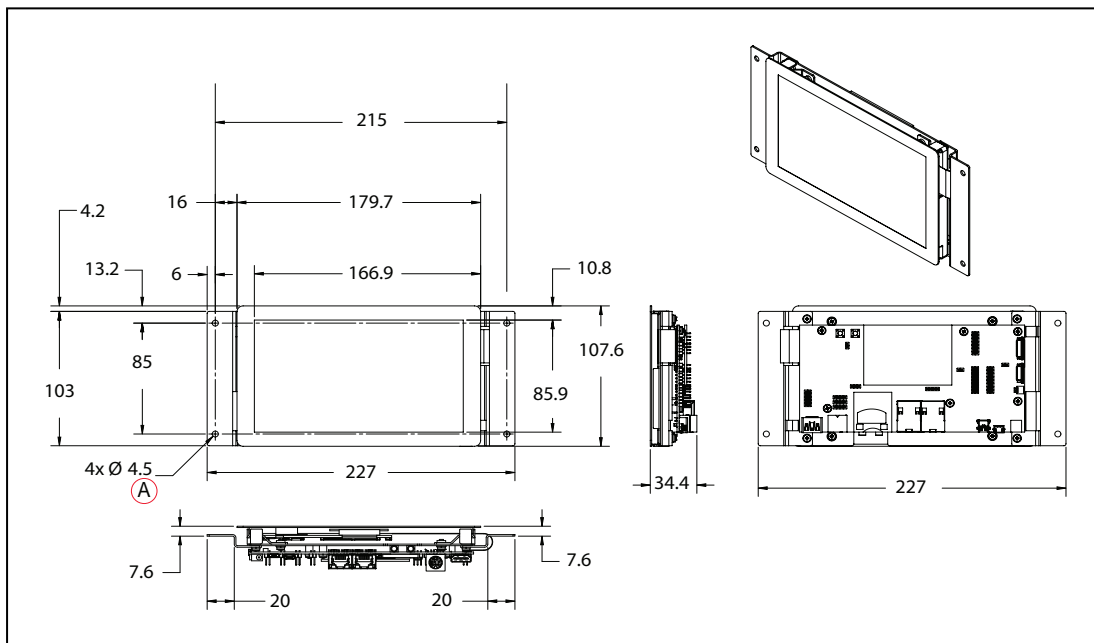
Mounting Dimensions for the Touchscreen, (A) Through Hole (units are mm)
